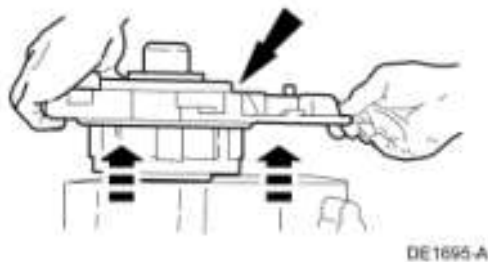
Removing Front Adapter, Input Shaft And Complete Carrier
